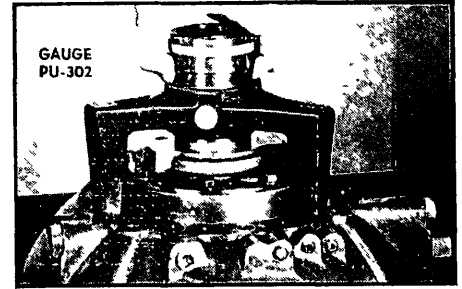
Using gauge shown, measure distance from rear face of bell housing to rear face of reactor clutch housing
